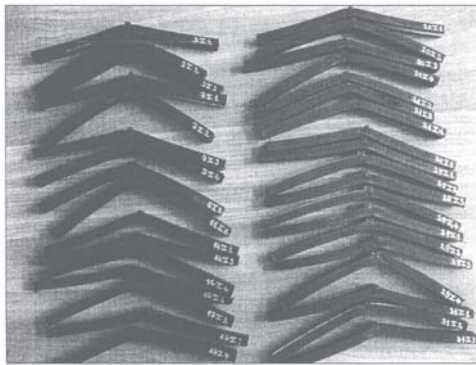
Bend testing samples with fracture in the weld - probes 3, 7, 8, 11, 14, 17, 20, 21, 25, 29 and 31
